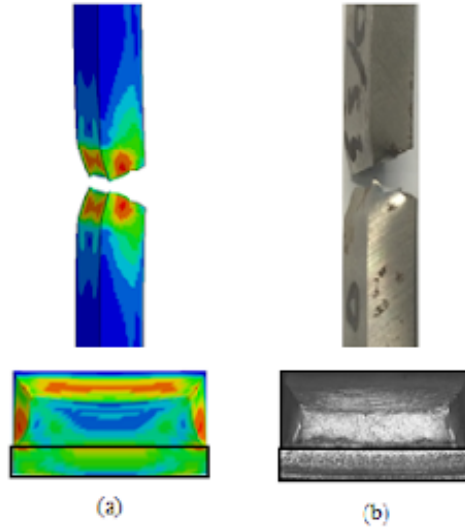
The fractured SENT specimen: Simulated specimen (a); tested specimen (b).
